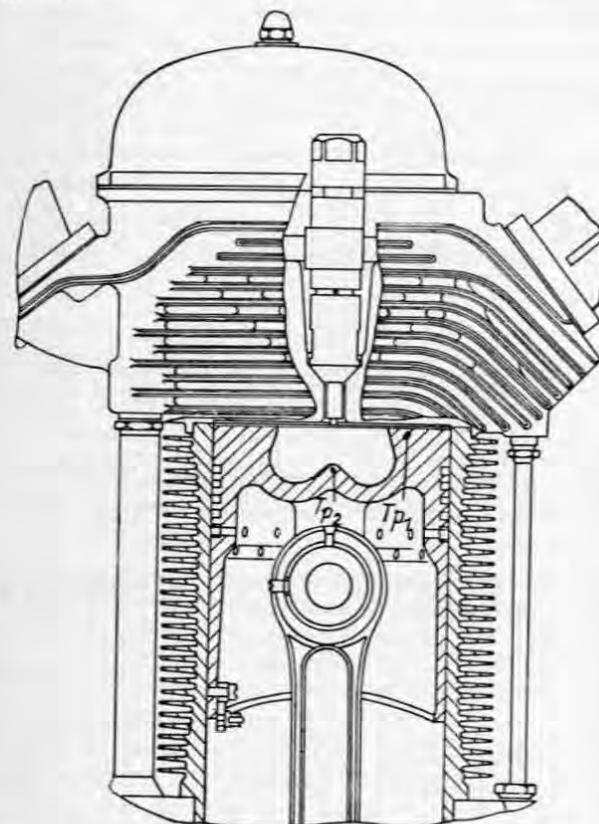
Sectional view of cylinder and piston of the T 928 four-stroke experimental engine.
